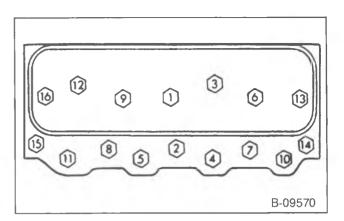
Cylinder Head Bolt Tightening Sequence (7.4L Engines)
